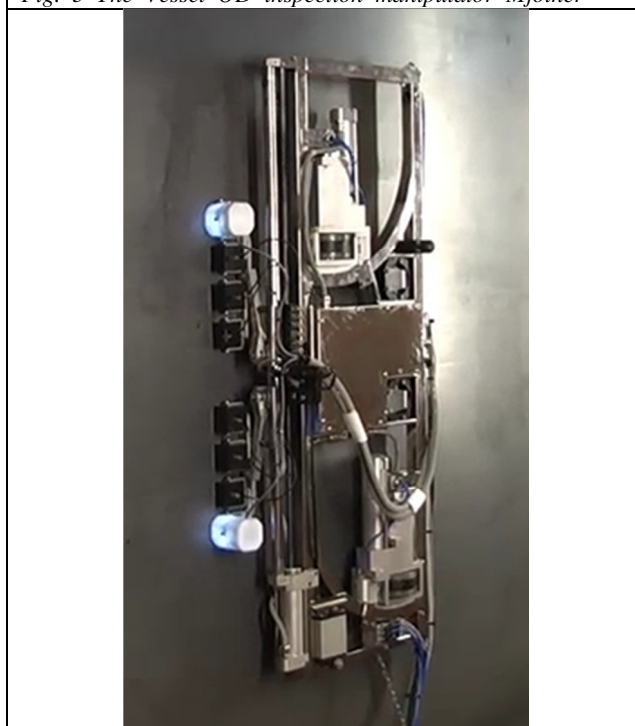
The Vessel OD inspection manipulator Mjölner scanning
